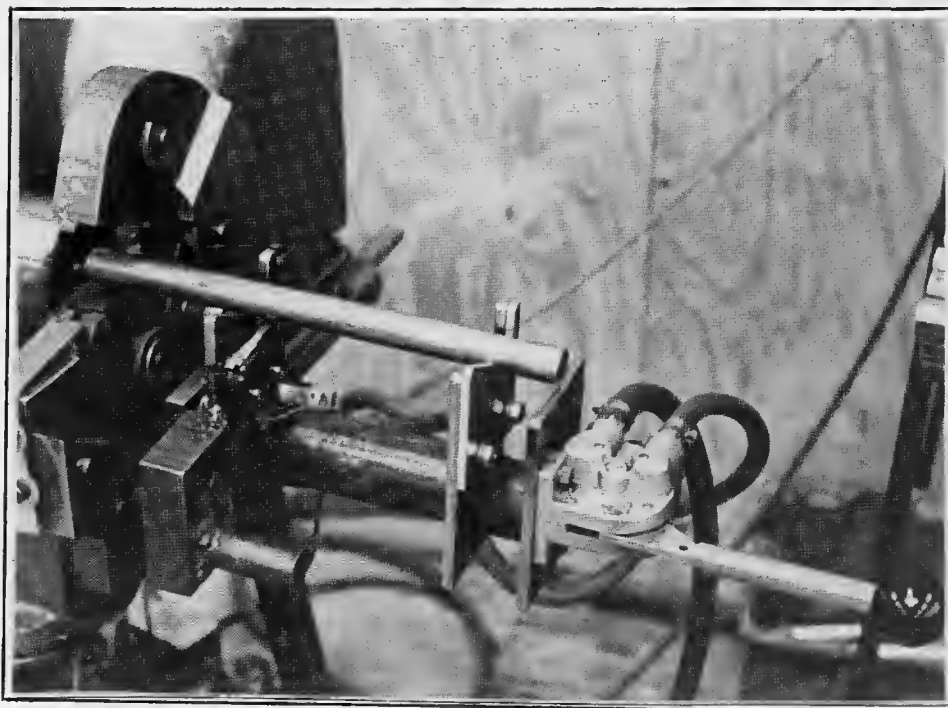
Tube in Place in Cradles with Vise Jaw Open. Four-Way Valve to Right of Tube.
